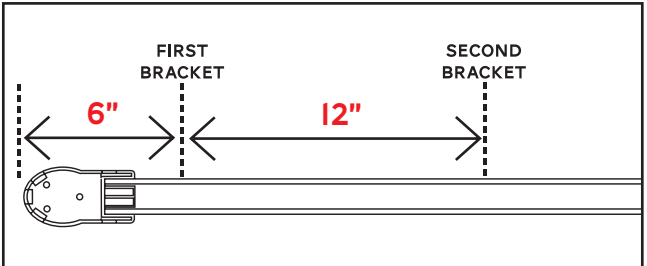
Install first bracket six inches in, then the second bracket twelve inches in from the first
